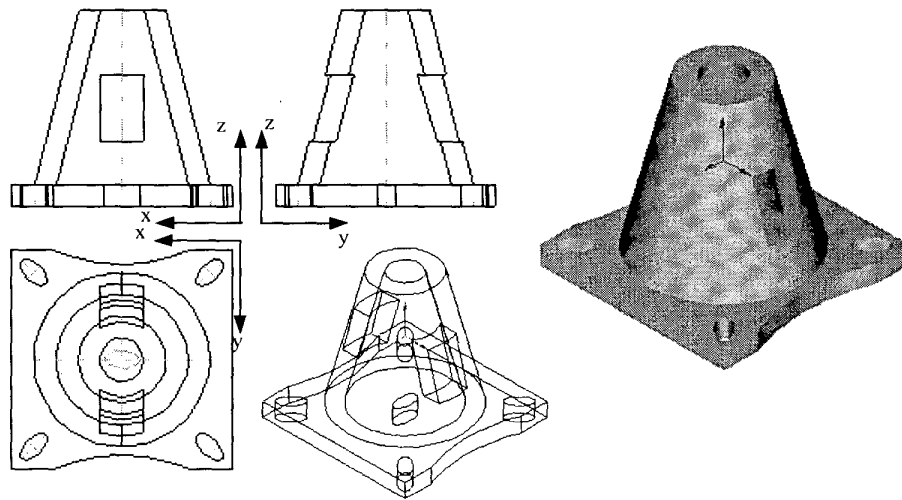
A mechanical part reconstructed from a three-view engineering drawing with straight lines, circular, hyperbola, and elliptical arcs.
